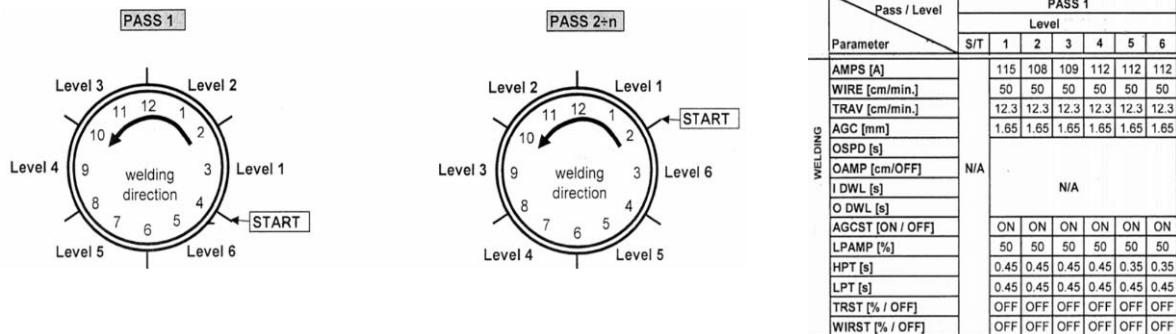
Example for orbital TIG welding : Levels - sectors of welding and welding parameters
